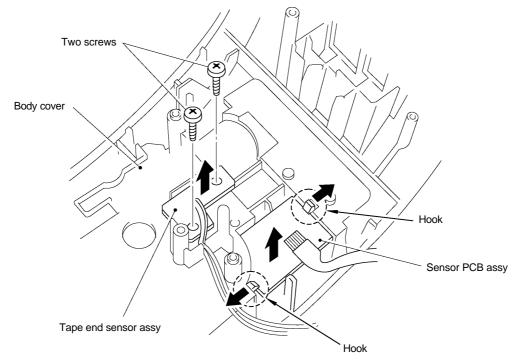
Removing the Tape End Sensor Assy and the Sensor PCB Assy
